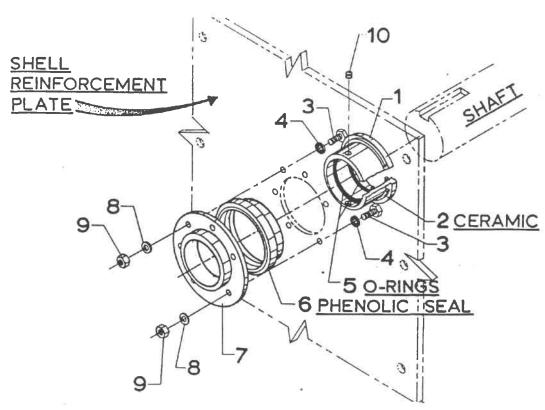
FIGURE VII-R: DETAIL OF SEAL ASSEMBLY
